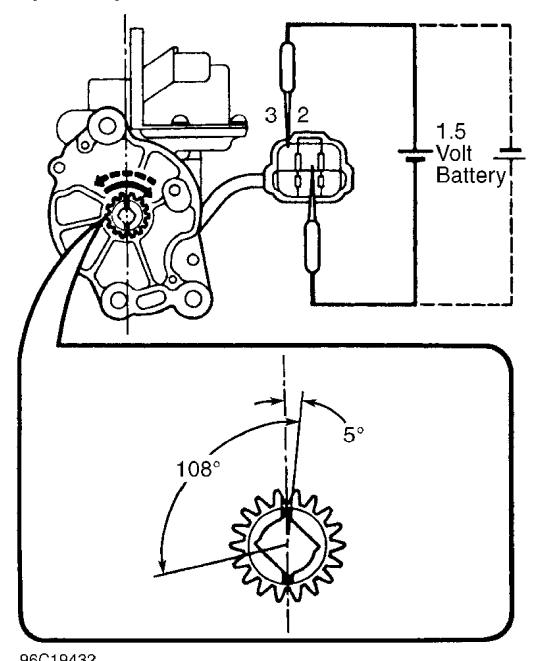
Installing Rear Differential Lock Actuator Courtesy of Toyota Motor Sales, U.S.A., Inc.
